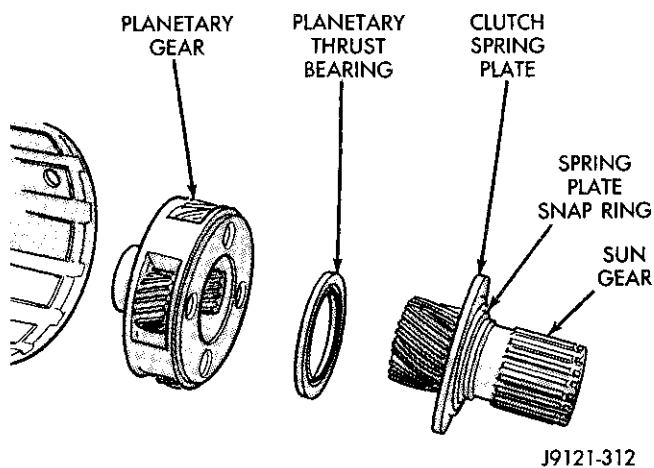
Removing Sun Gear, Thrust Bearing And Planetary Gear
